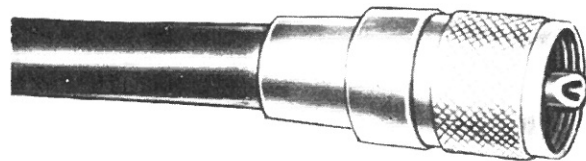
Plug and Cable with Set Screw in Plug Shell Tightened
